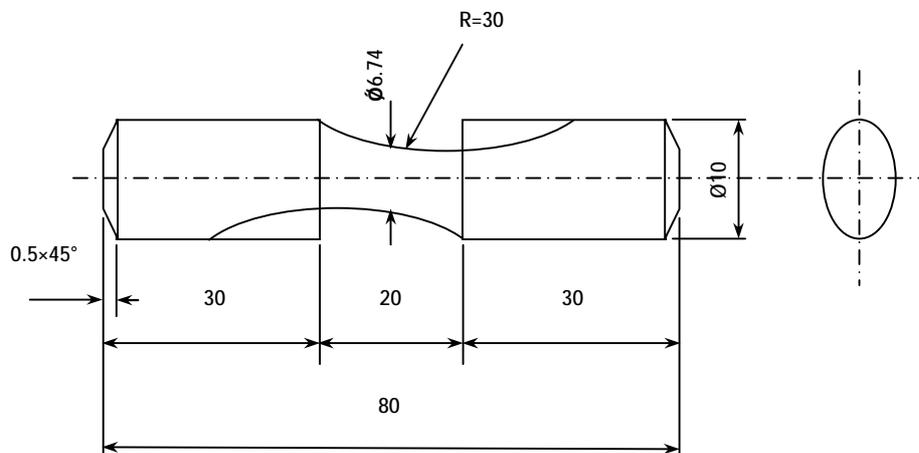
Specimen geometry and dimensions for fatigue test (all dimensions in mm).
